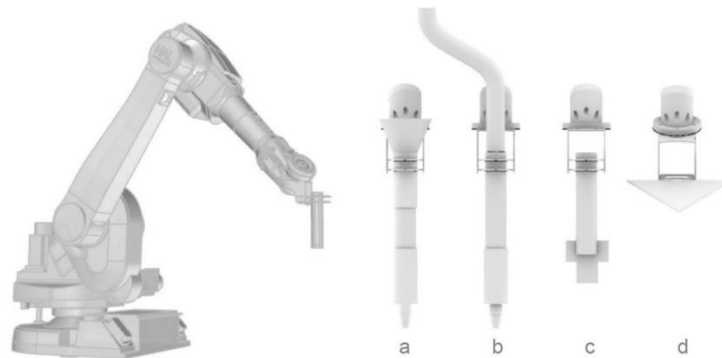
The six-axes robotic arm and the mountable end-effectors, (a) pouring funnel, (b) subtraction vacuum machine, (c) displacement plate, and (d) tilting base.
